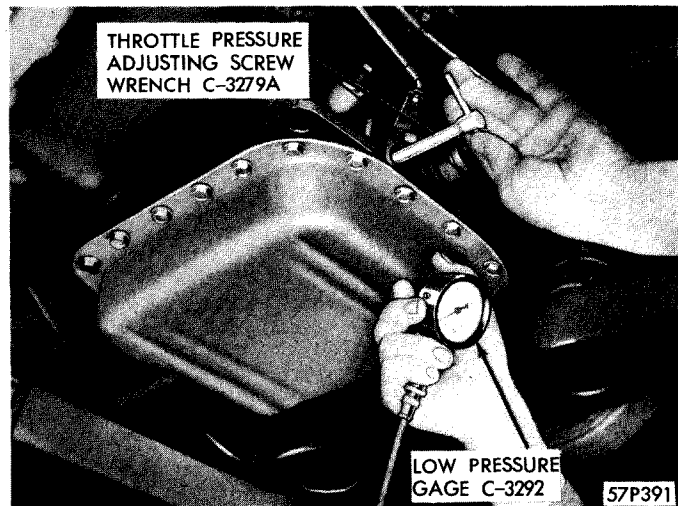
Adjusting Throttle Pressure with Wrench C-3279A
